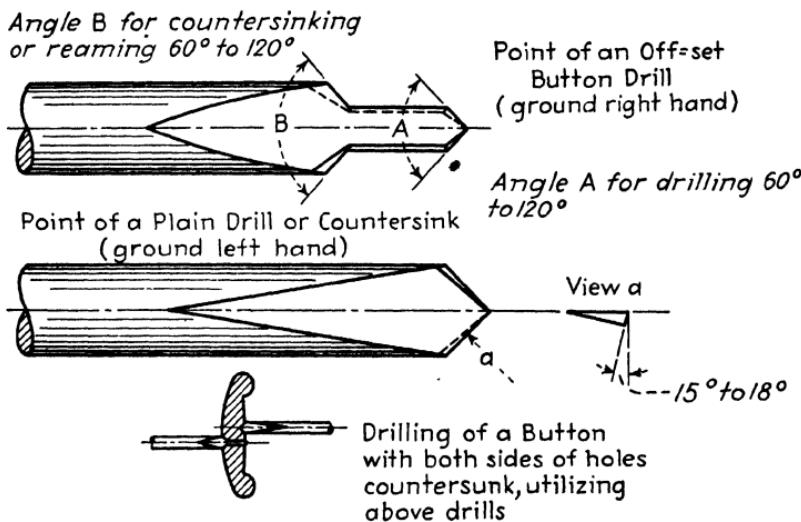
Drills used for small holes. Drills and countersinks are often used in pairs as shown.
